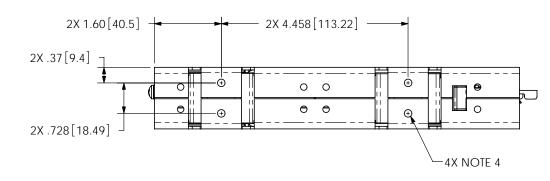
GDL 59 Modular Rack Outline Drawing (Sheet 2)
